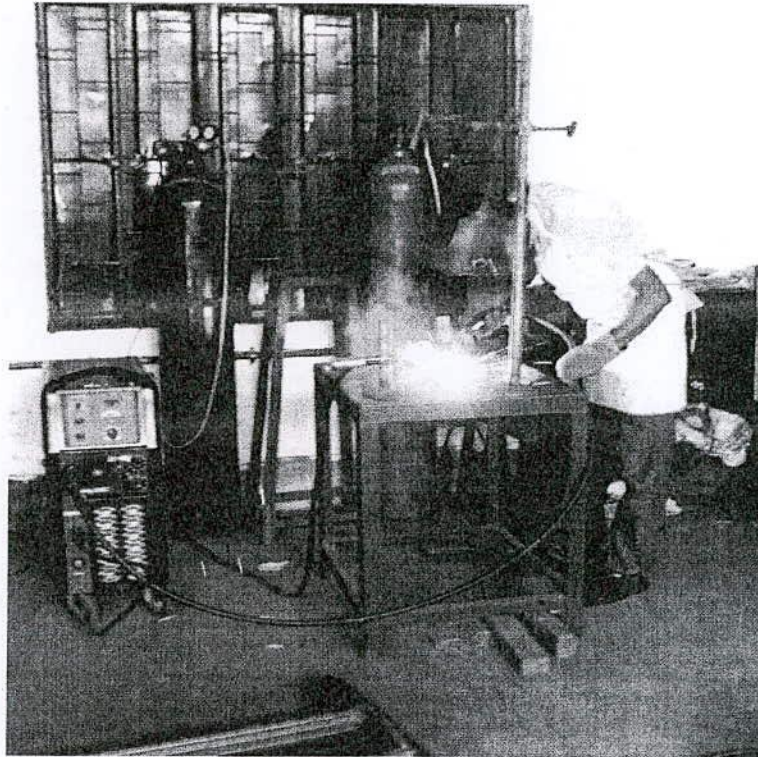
(b) Photograph of MIG Welding operation
